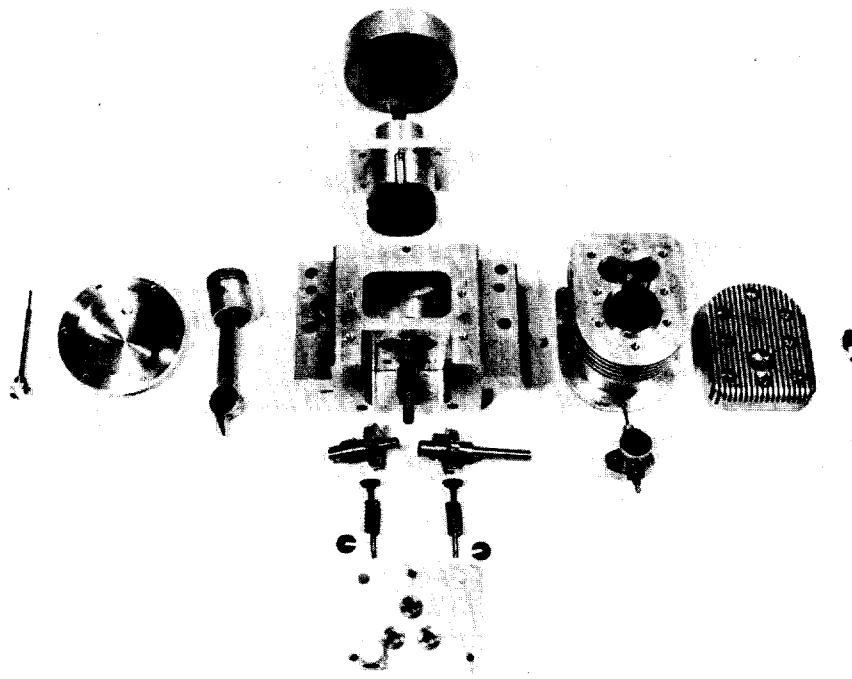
Disassembled View of L-Head, Four-Cycle Engine
